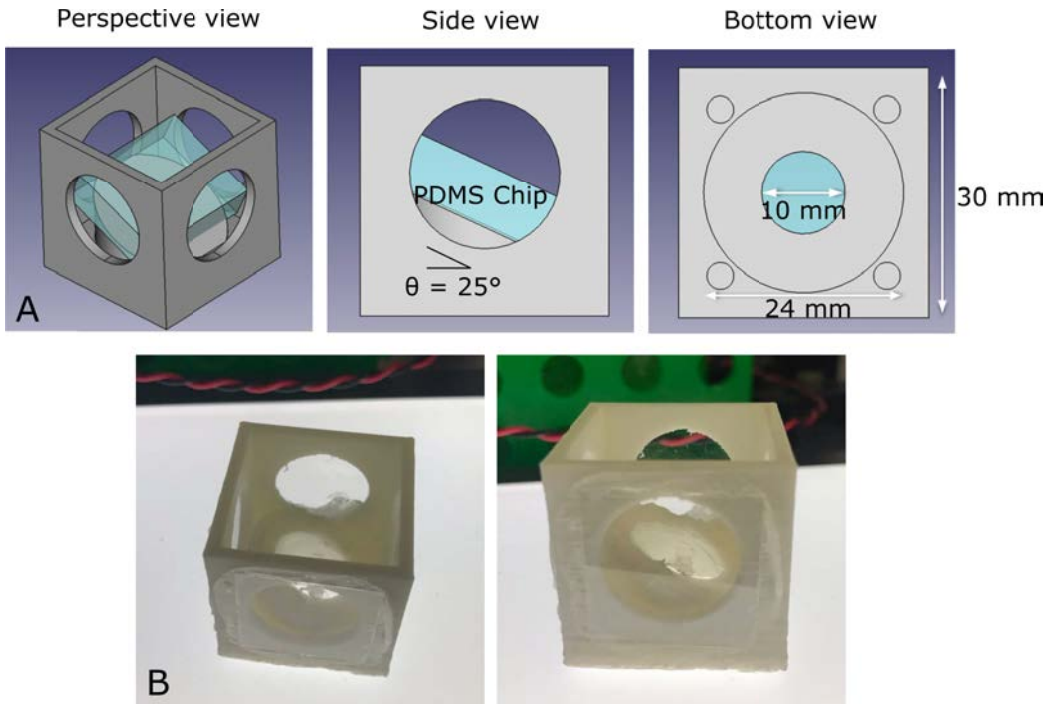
Schemes showing the perspective, side and bottom view of the LSFM holder design (A). Its dimensions and the tilt angle of the pedestal are denoted in the schemes. Images showing the 3D printed LSFM holder (B).
